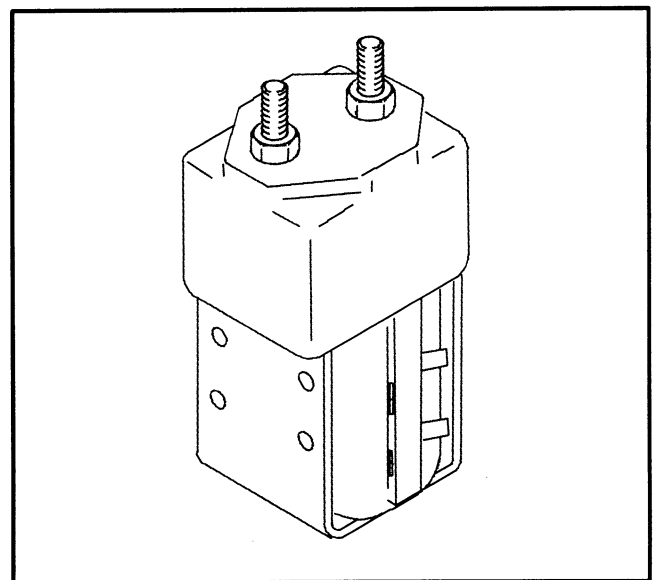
TYPICAL SPNO CONTACTOR ASSEMBLY
